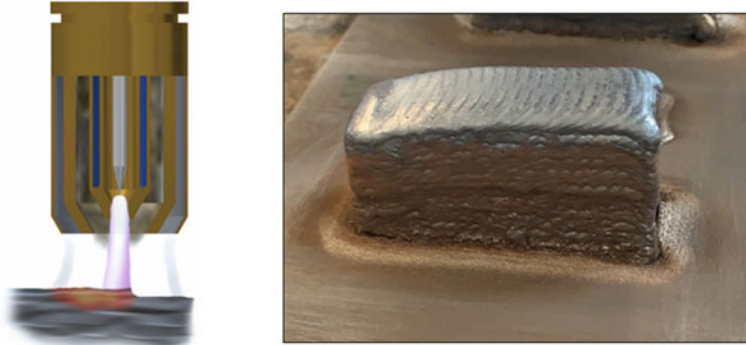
Plasma transferred-arc (left) and FeNi36 wall structure via PTA (right)
